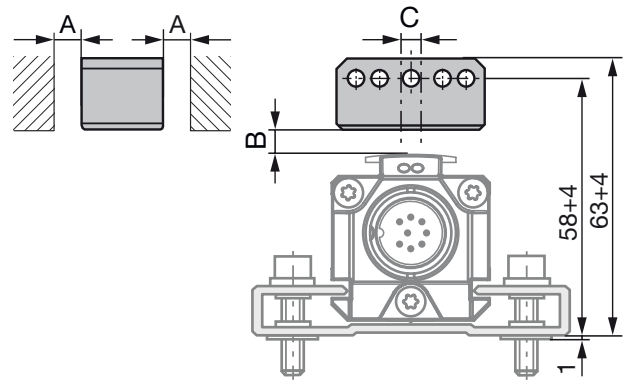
Dimensions and distances with BTL6-A-3801-2 magnet
